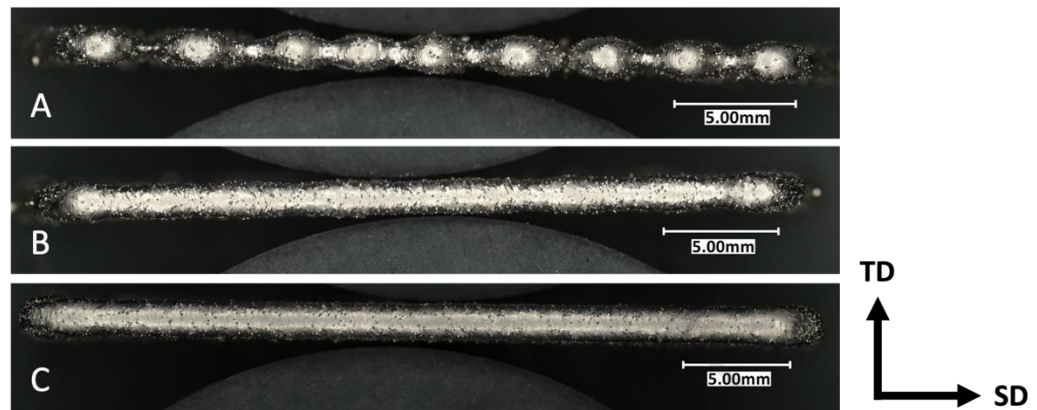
Top view of DOE specimens. (a) Severe lack of fusion. Build Parameters: 608 W – 10.16 mm/s. (b) Inconsistent weld bead thickness. Build Parameters: 1050 W – 12.70 mm/s. (c) Consistent weld bead. Build Parameters: 1420 W – 13.96 mm/s.
